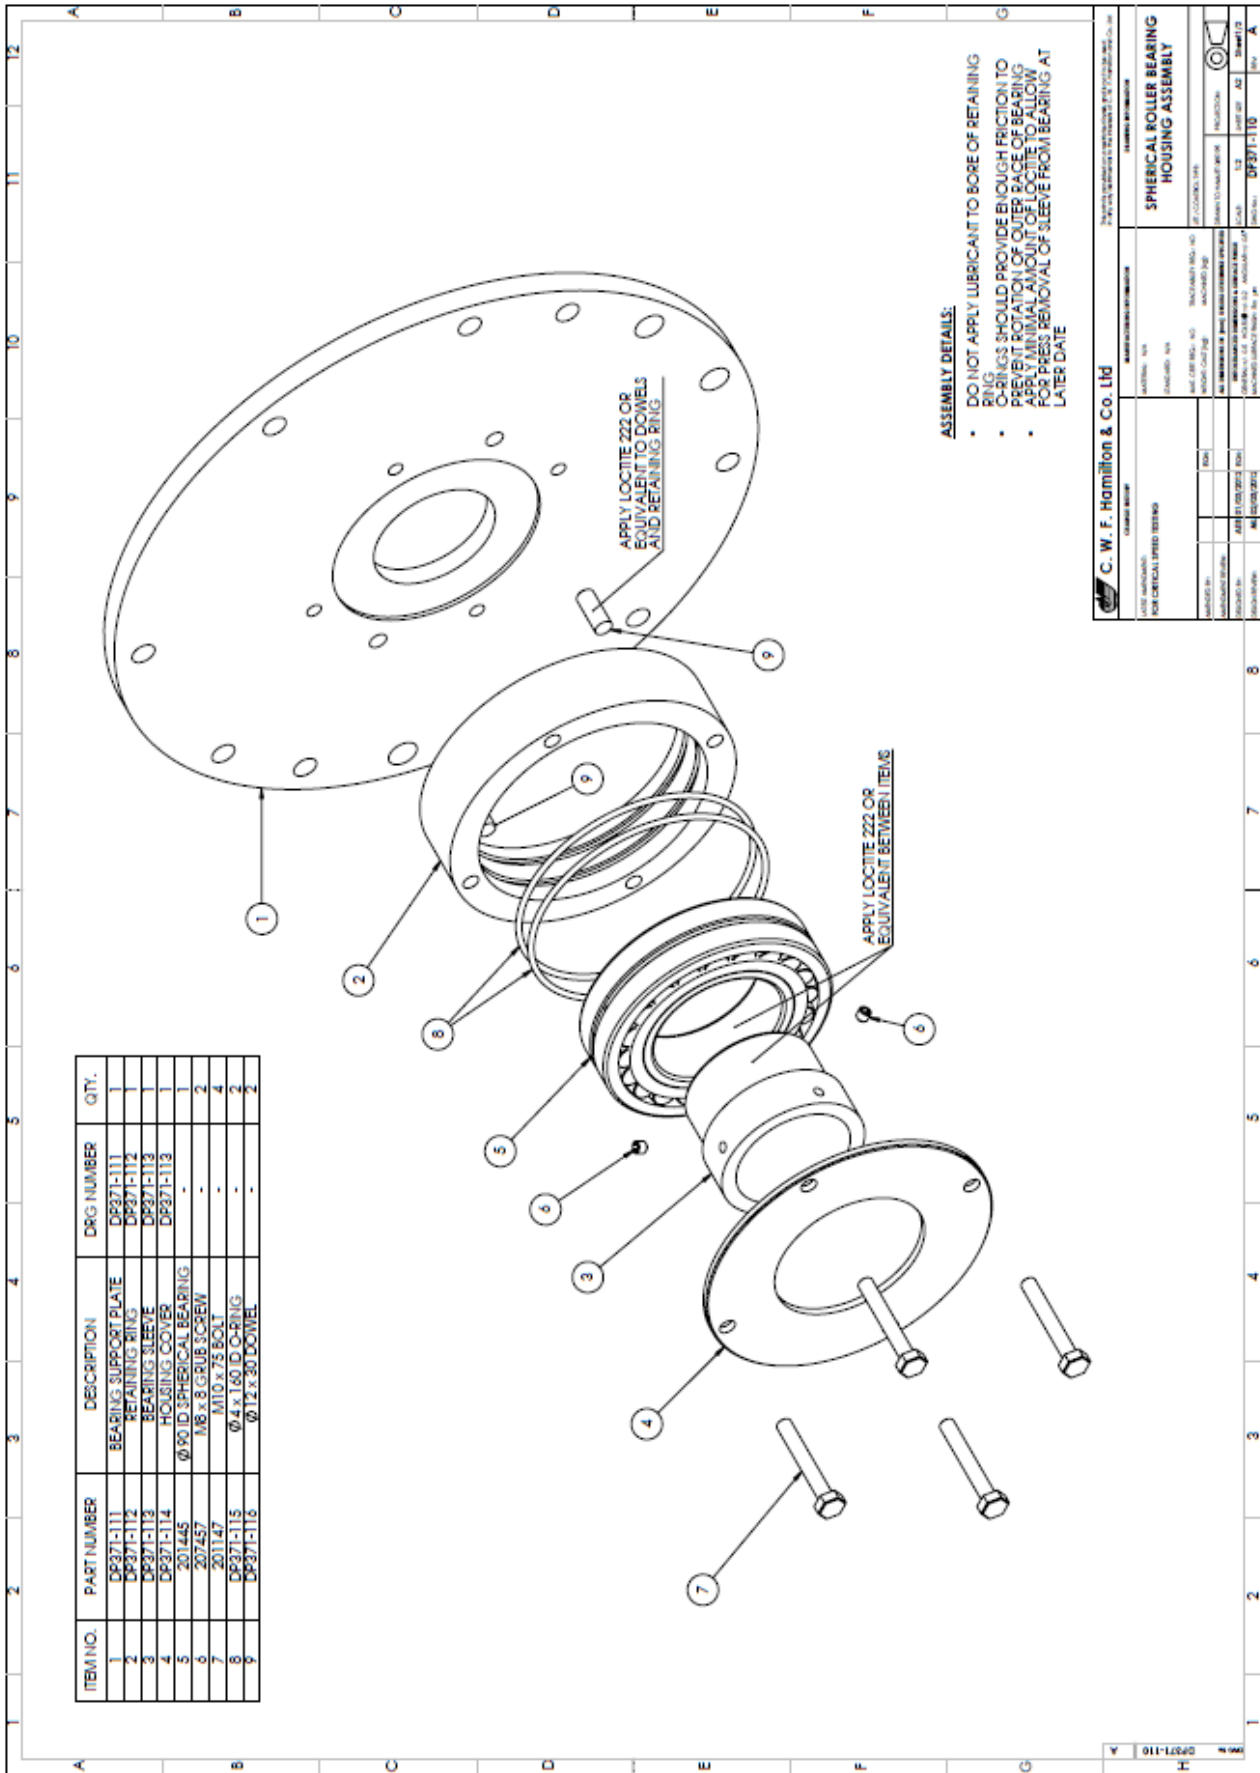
Spherical Bearing Housing Exploded View Drawing
